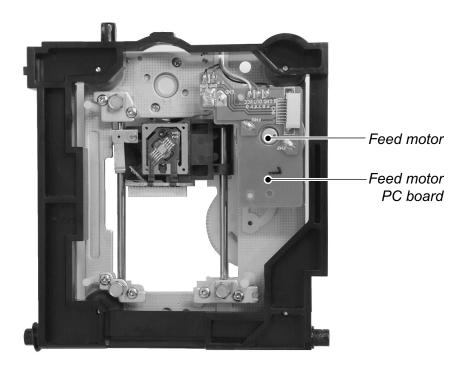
Pickup mechanism chassis assembly (Bottom side)
